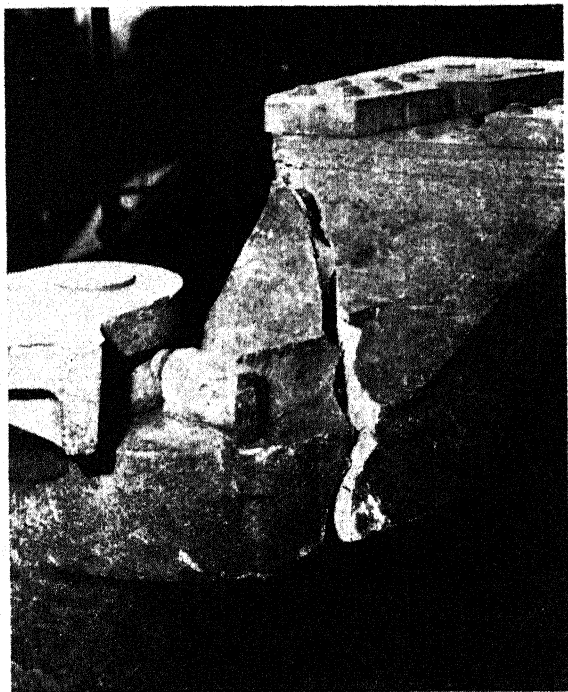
Type of casting failure which forced clam shell power arm brackets into arc welded low-alloy steel.
